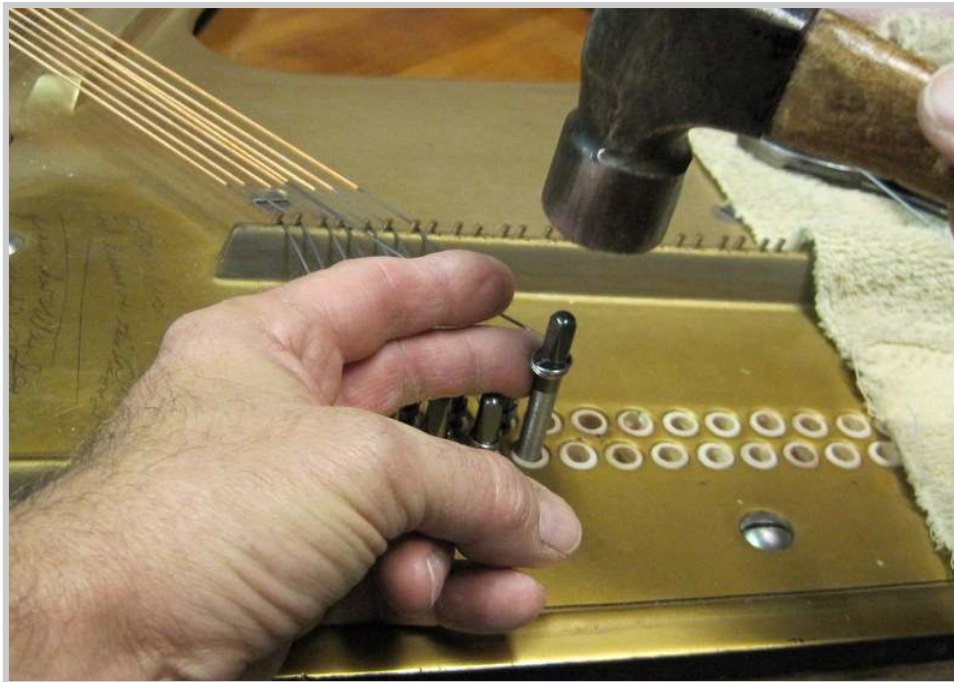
While holding the pin upright, it is gently tapped with the hammer to start it in the hole.
